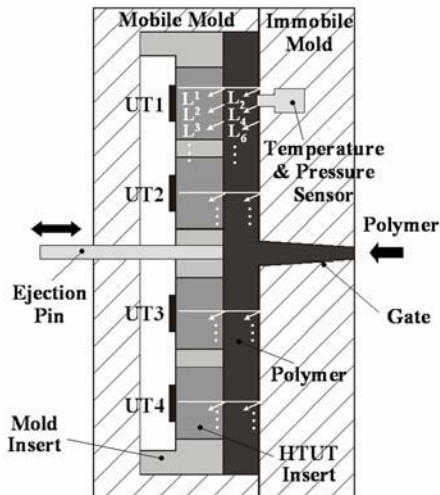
Cross-sectional view of the mold (mobile and immobile), mold insert and molded part (polymer) with four HTUT sensor inserts (UT1-4).  $L^n$  and  $L_{2n}$  ( $n = 1,2,3,\dots$ ) represent  $n$ -th round trip echoes propagating in the HTUT insert and those in the polymer, respectively.
